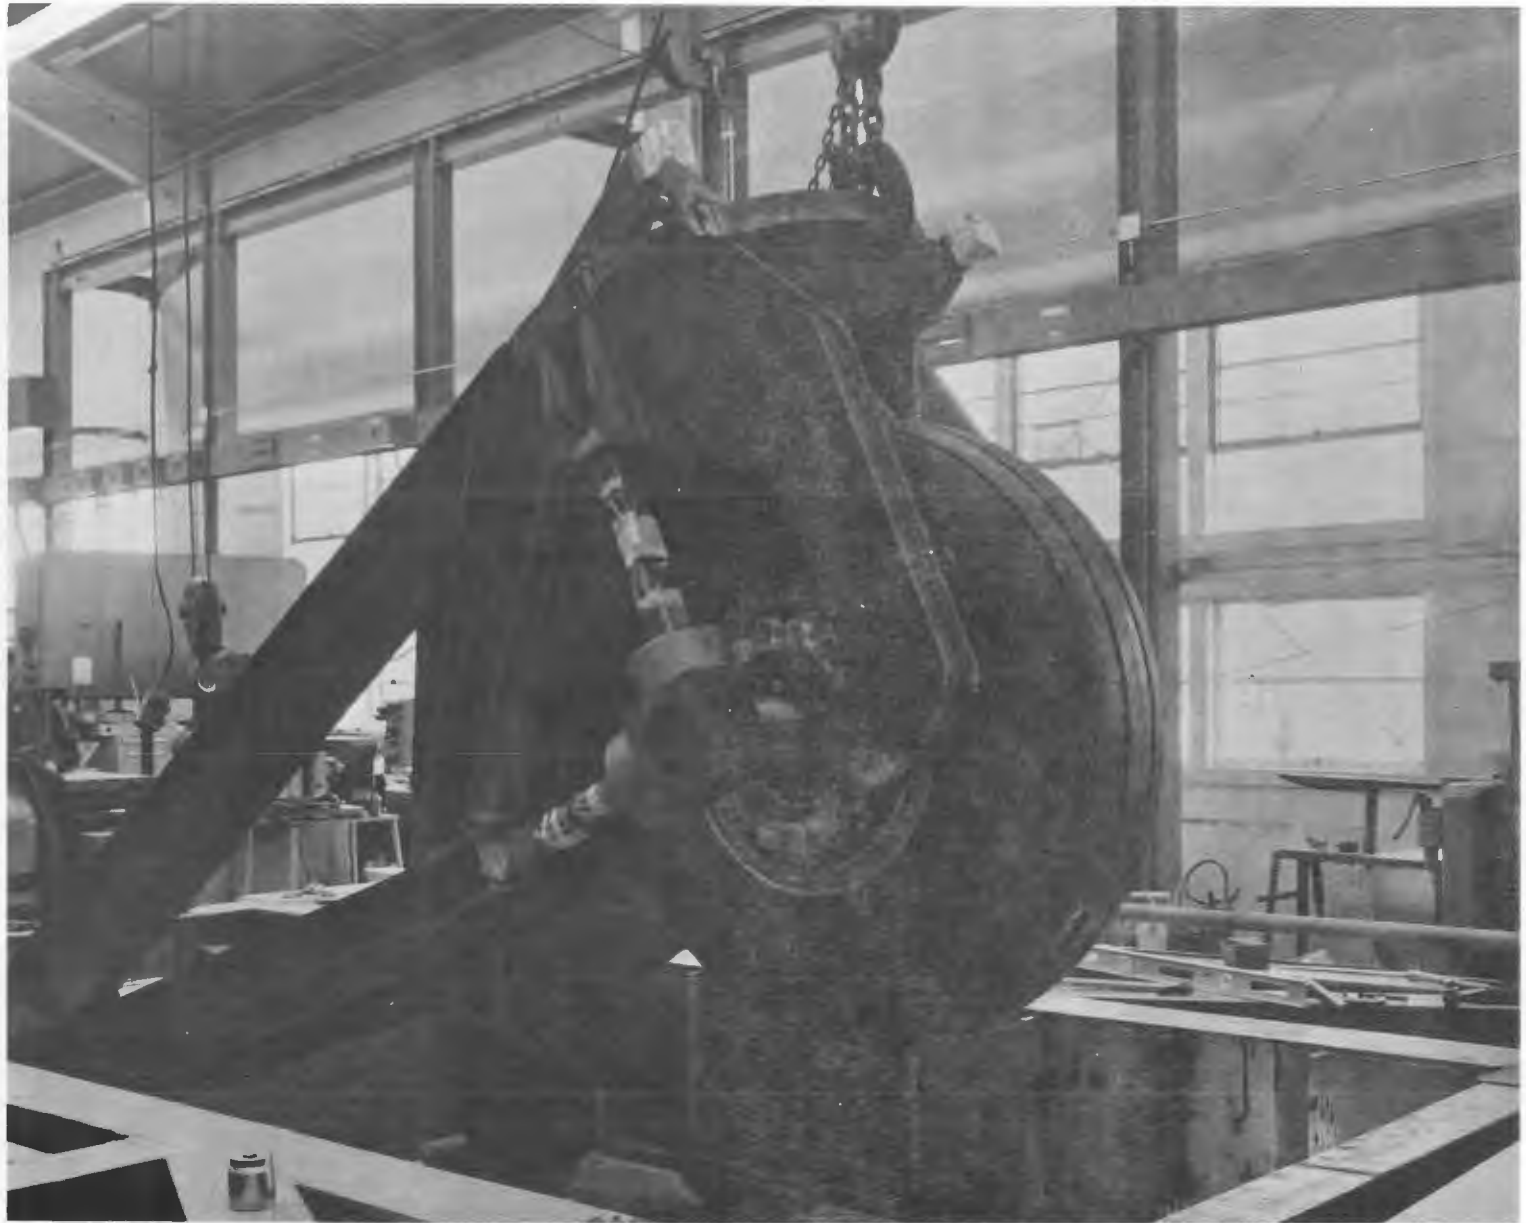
DYNAMOMETER AND WHEEL ASSEMBLY SHOWING VERTICAL AND HORIZONTAL LOAD LINKS
